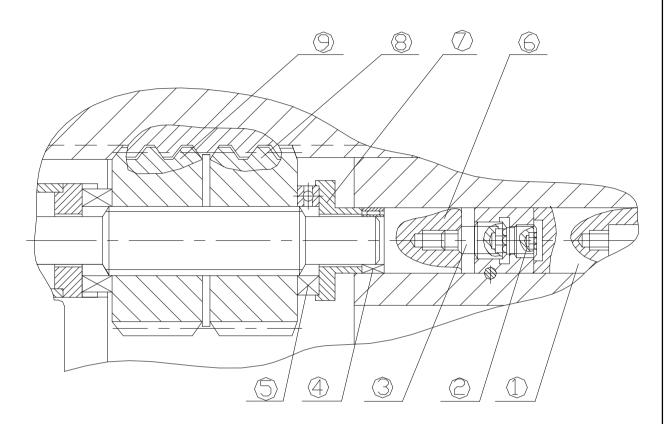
Double screw bar construction for machine model TPX6113/2 (taper 7:24)
